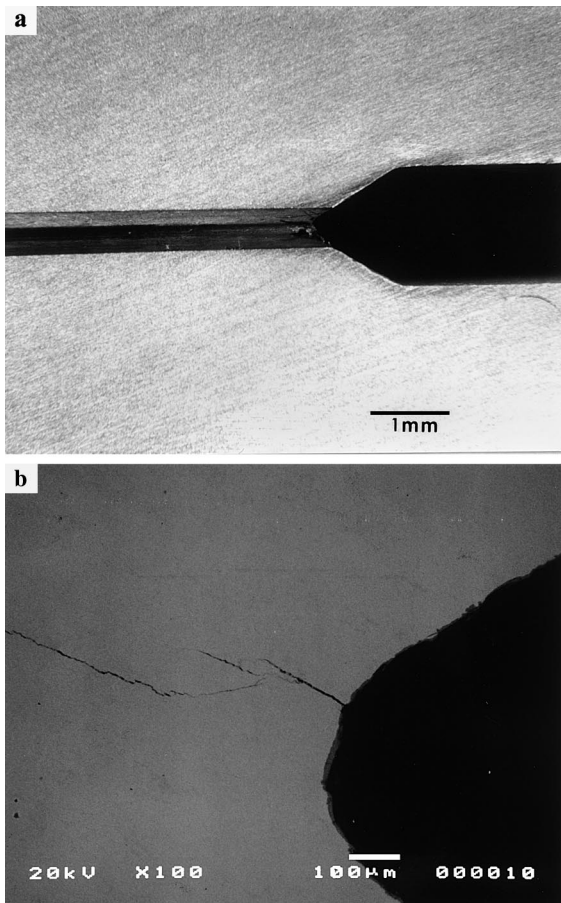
(a) U type groove formed on both sides of L30 specimen before the initiation of DHC and (b) the slanted crack growth after DHC.
